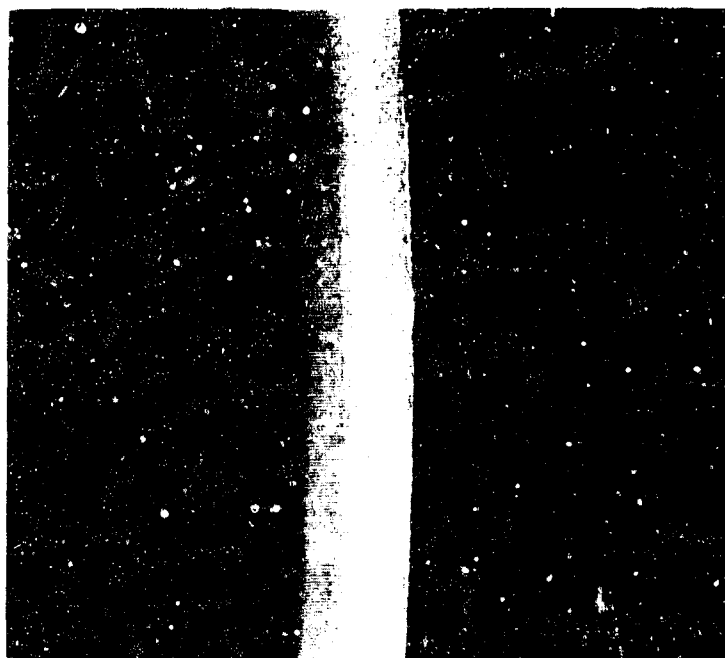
Build 39 Seal Edge at Post-Test Inspection
